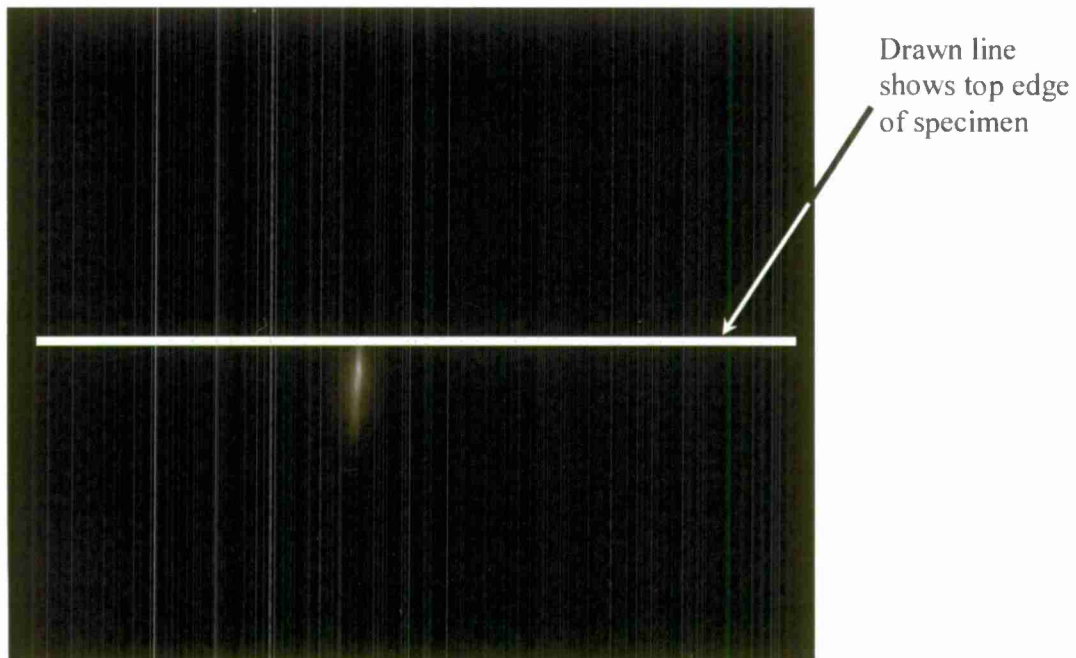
Typical image from the thermal-imaging camera viewing an aluminum test specimen with a 12-mm long crack. The crack is made visible due to frictional heating. The drawn line in the figure indicates the top edge of the specimen.
